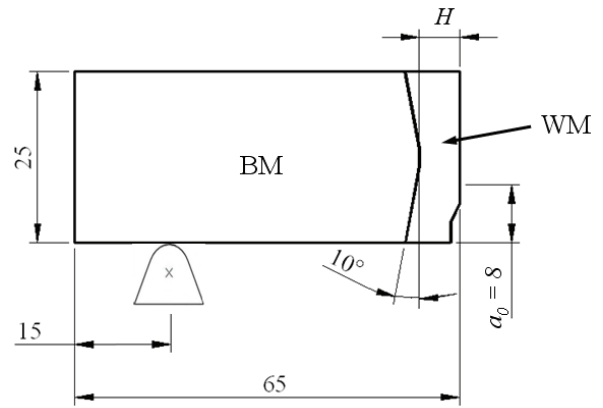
Dimensions of SENB specimen and welded joint ($2H = 6$ mm)
